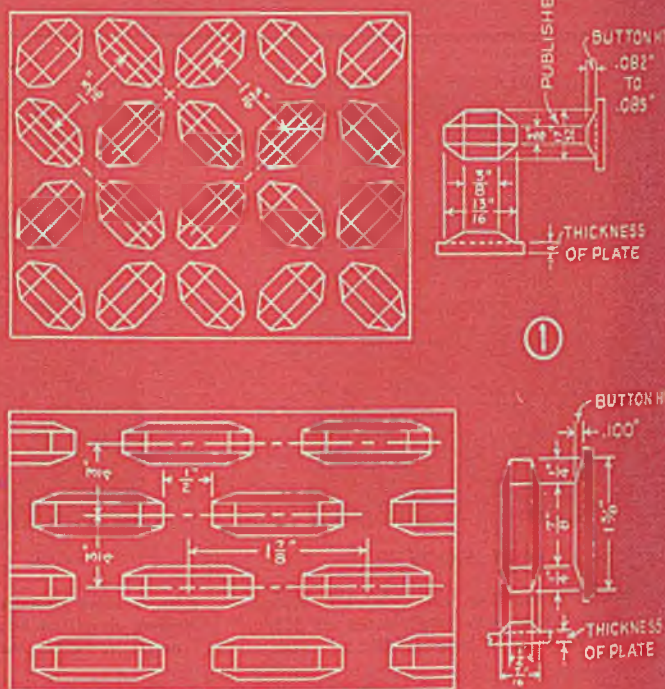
Two types of steel floor plates with raised "non-skid" buttons, in rolling which Carnegie-Illinois Steel Corp. required a special lathe for machining button indentations in new rolls and for remachining them in redressed rolls
